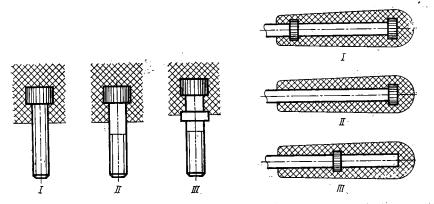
Incorrect (I) and correct (II, III) setting of threaded rod inserts
